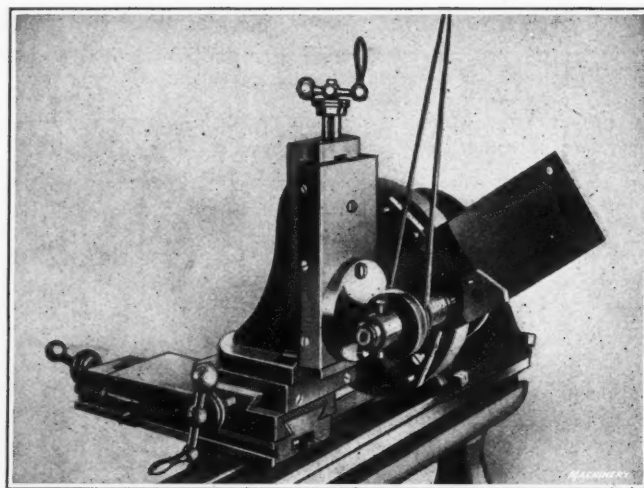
Milling Edges of Gage and Slots on Master Plate
